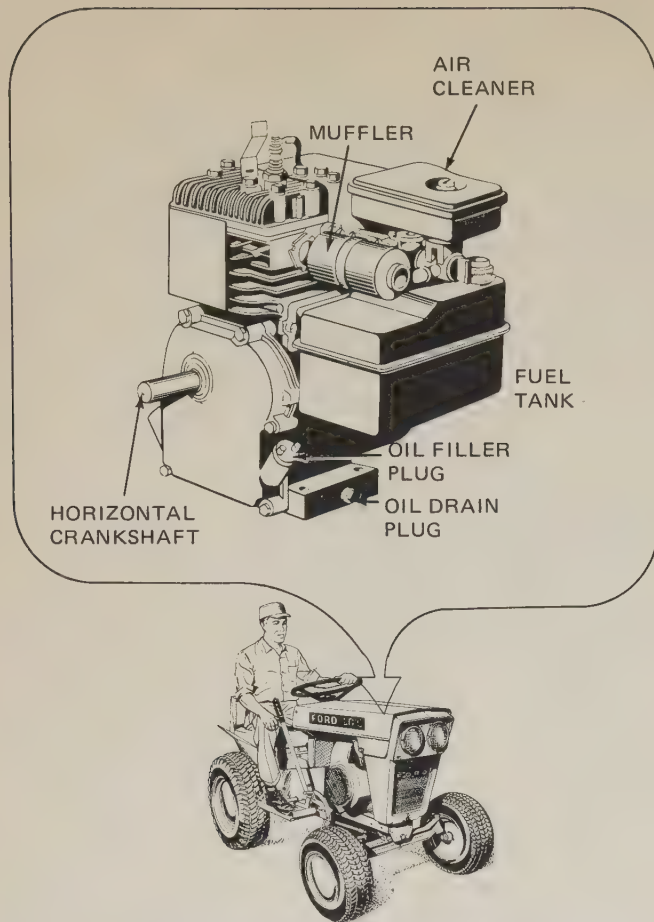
Some small engines have a horizontal crankshaft such as this one used in a riding mower.
